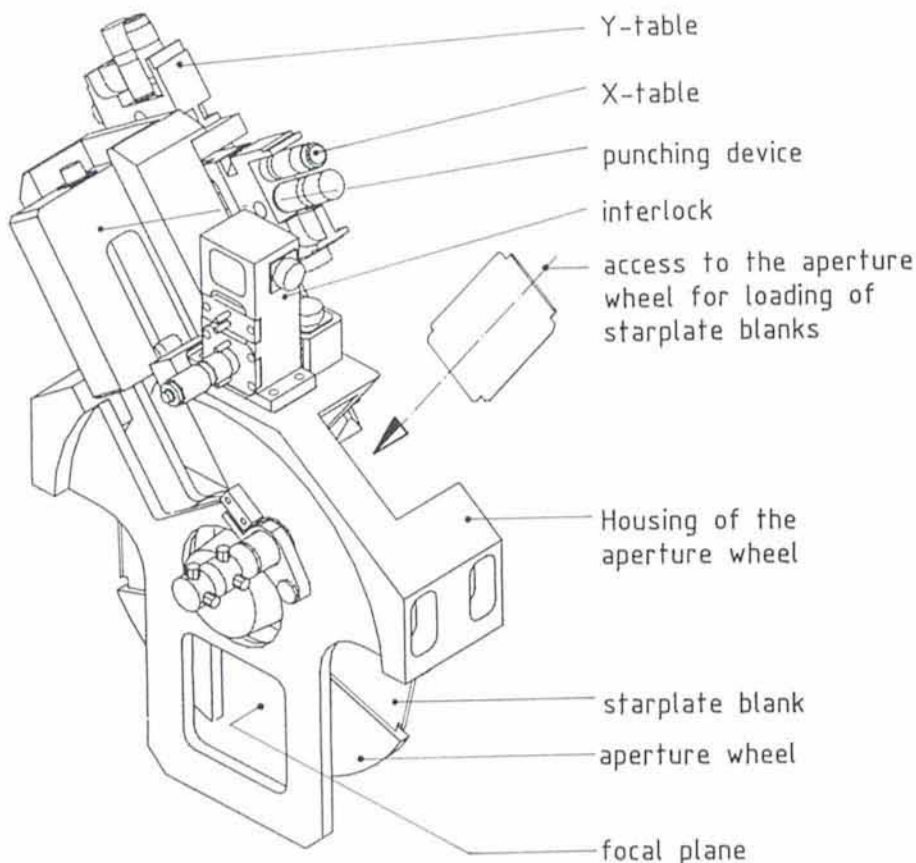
A CAD drawing of the starplate unit with identifications of the main components.
